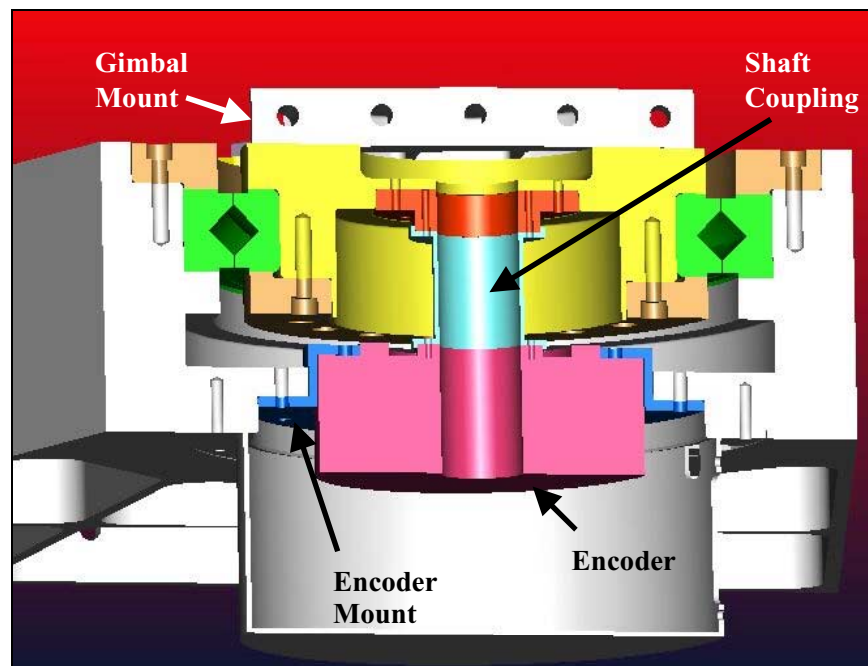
HITS Gimbal Encoder Assembly Component Layout
